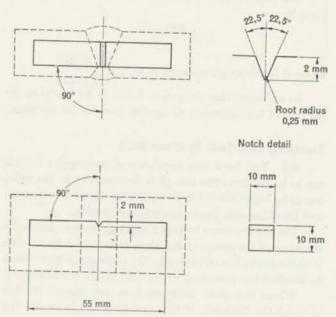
Specimen No. 5 Charpy V-Notch Impact Test Specimen
